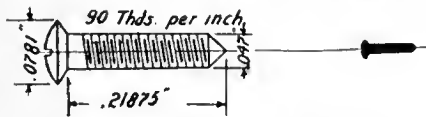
LEFT, ENLARGED VIEW. RIGHT, ACTUAL SIZE OF SCREW.
